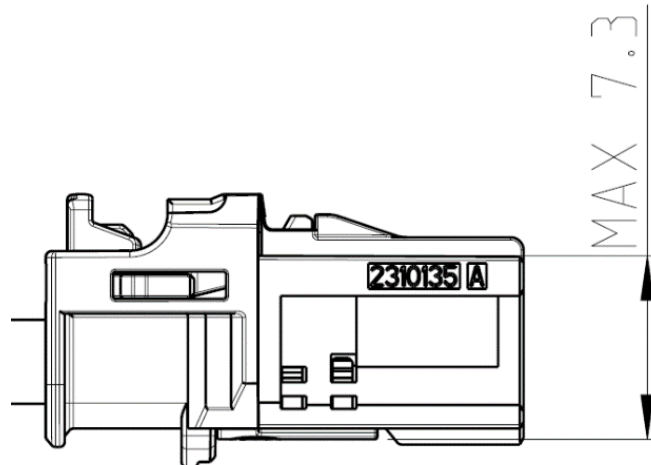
MAXIMUM DIMENSION WHEN TPA IS IN ENDLCK POSITION
